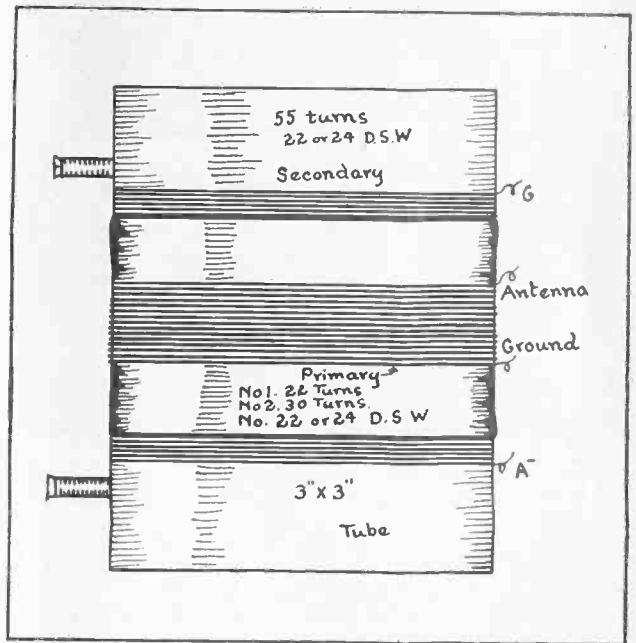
Constructional details of the transformers used in the circuit. Each tube has two windings, separated by a sheet of heavy paper.
